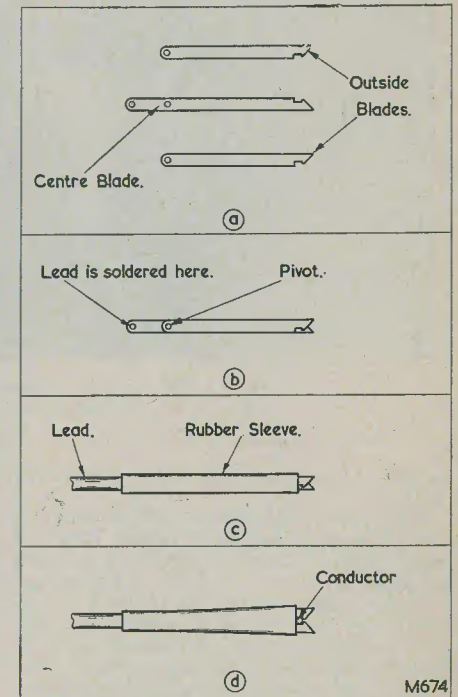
(a) The three blades which make up the "Slim-Grip." (b) The blades riveted together. (c) A rubber sleeve fitted over the assembly provides insulation. (d) The clip fitted to a conductor. The blades open out against the tension of the sleeve
